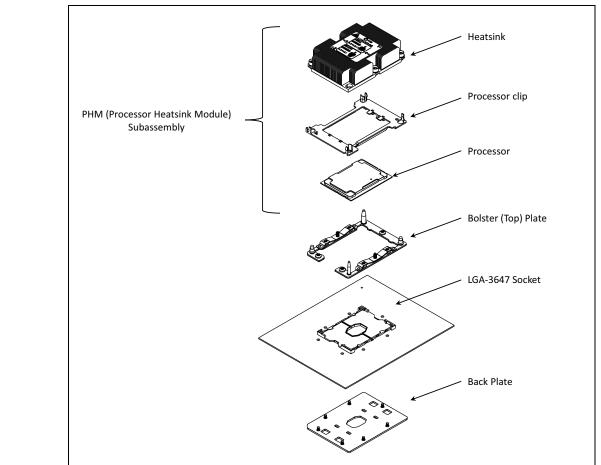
LGA3647-0 Enabling Components (Exploded View)
